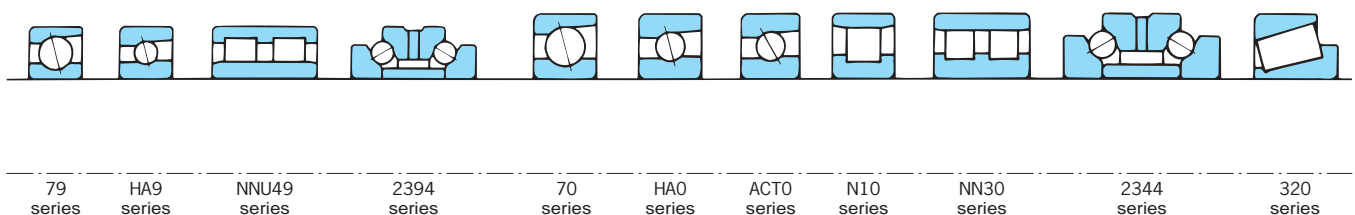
1 Installation space determined by types and dimension series of precision rolling bearings for machine tools
